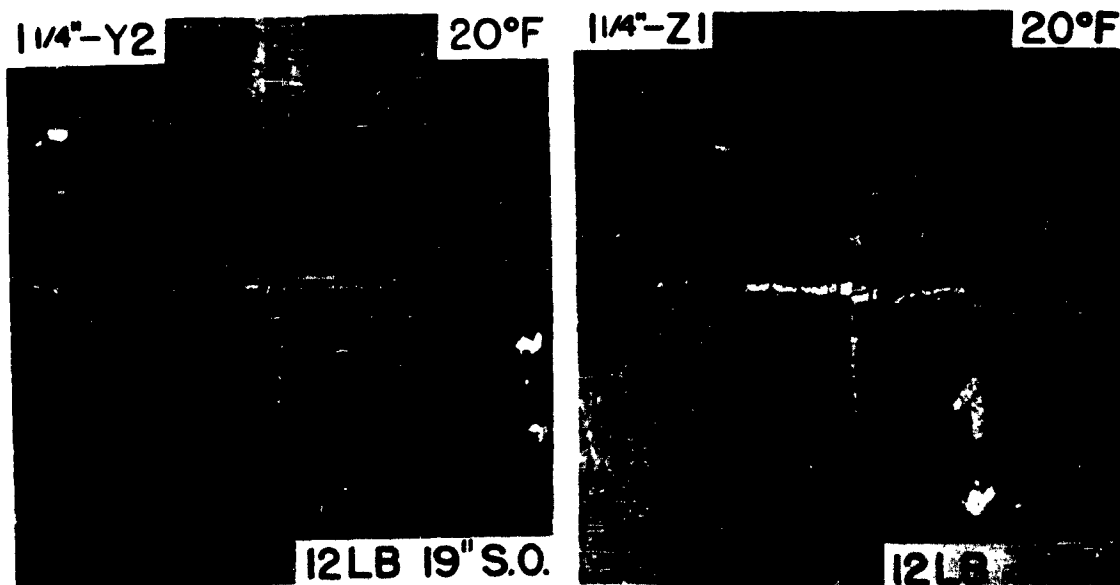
Crack-starter explosion-bulge test plates of 1-1/4-in. thick low-alloy HY-80 showing good resistance to brittle fracture at 20°F .
